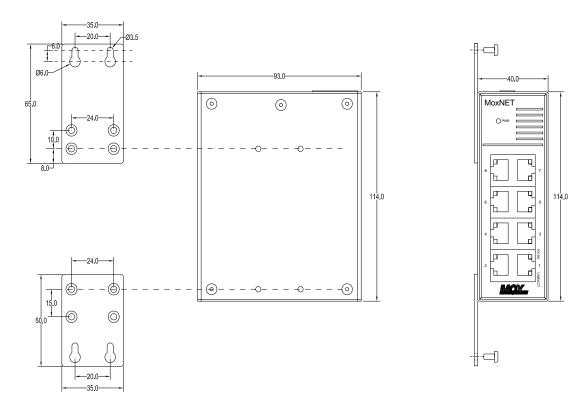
Installation Kit + Side View + Front View of Wall Mounted from the Side
